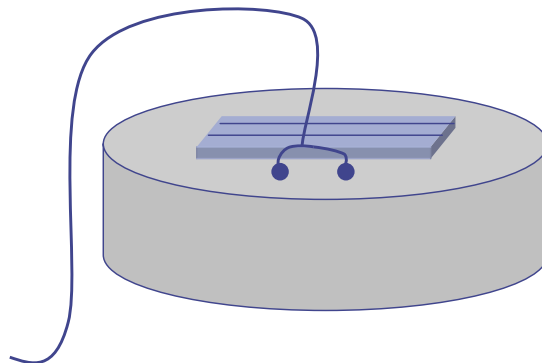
K-type thermoelement welded on the surface of base material next to laser coating.
